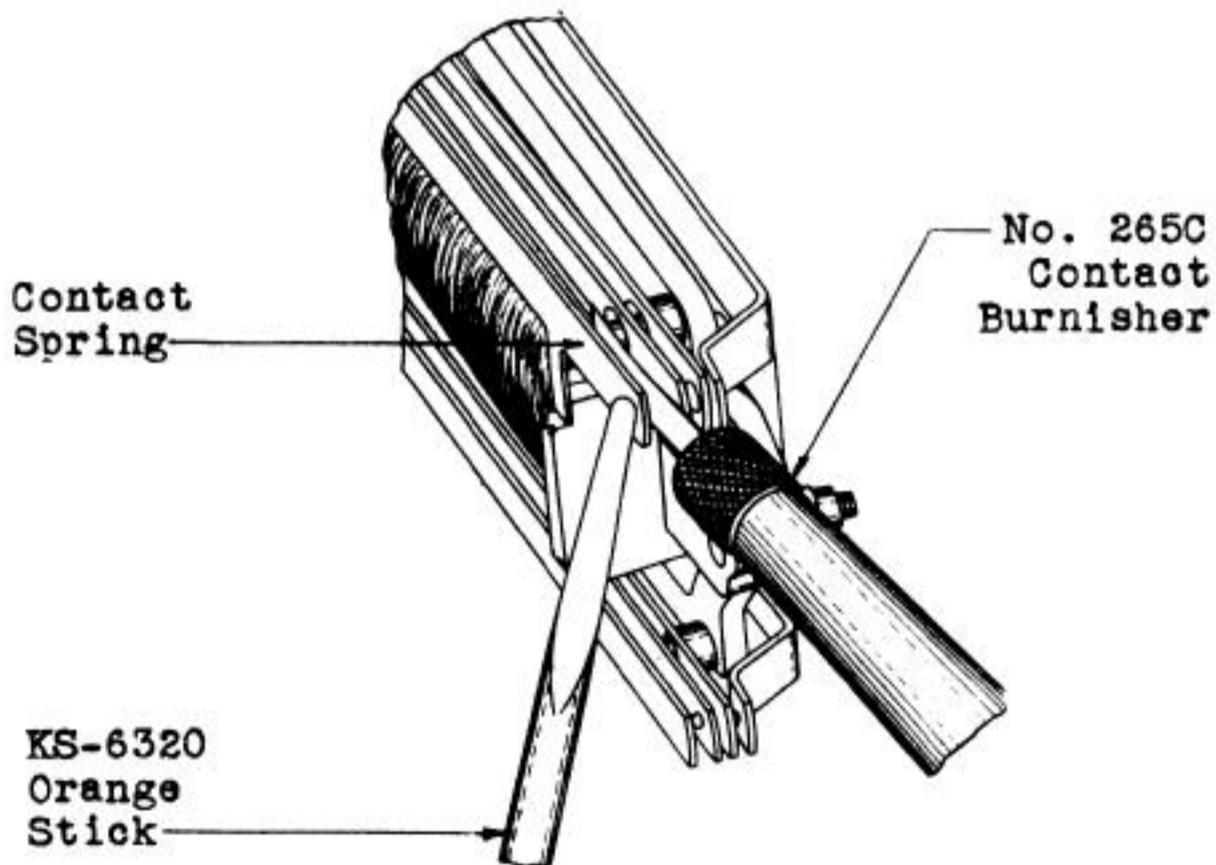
Method of Burnishing Contacts on A, E, F, H, R, T and AB Type Relays
